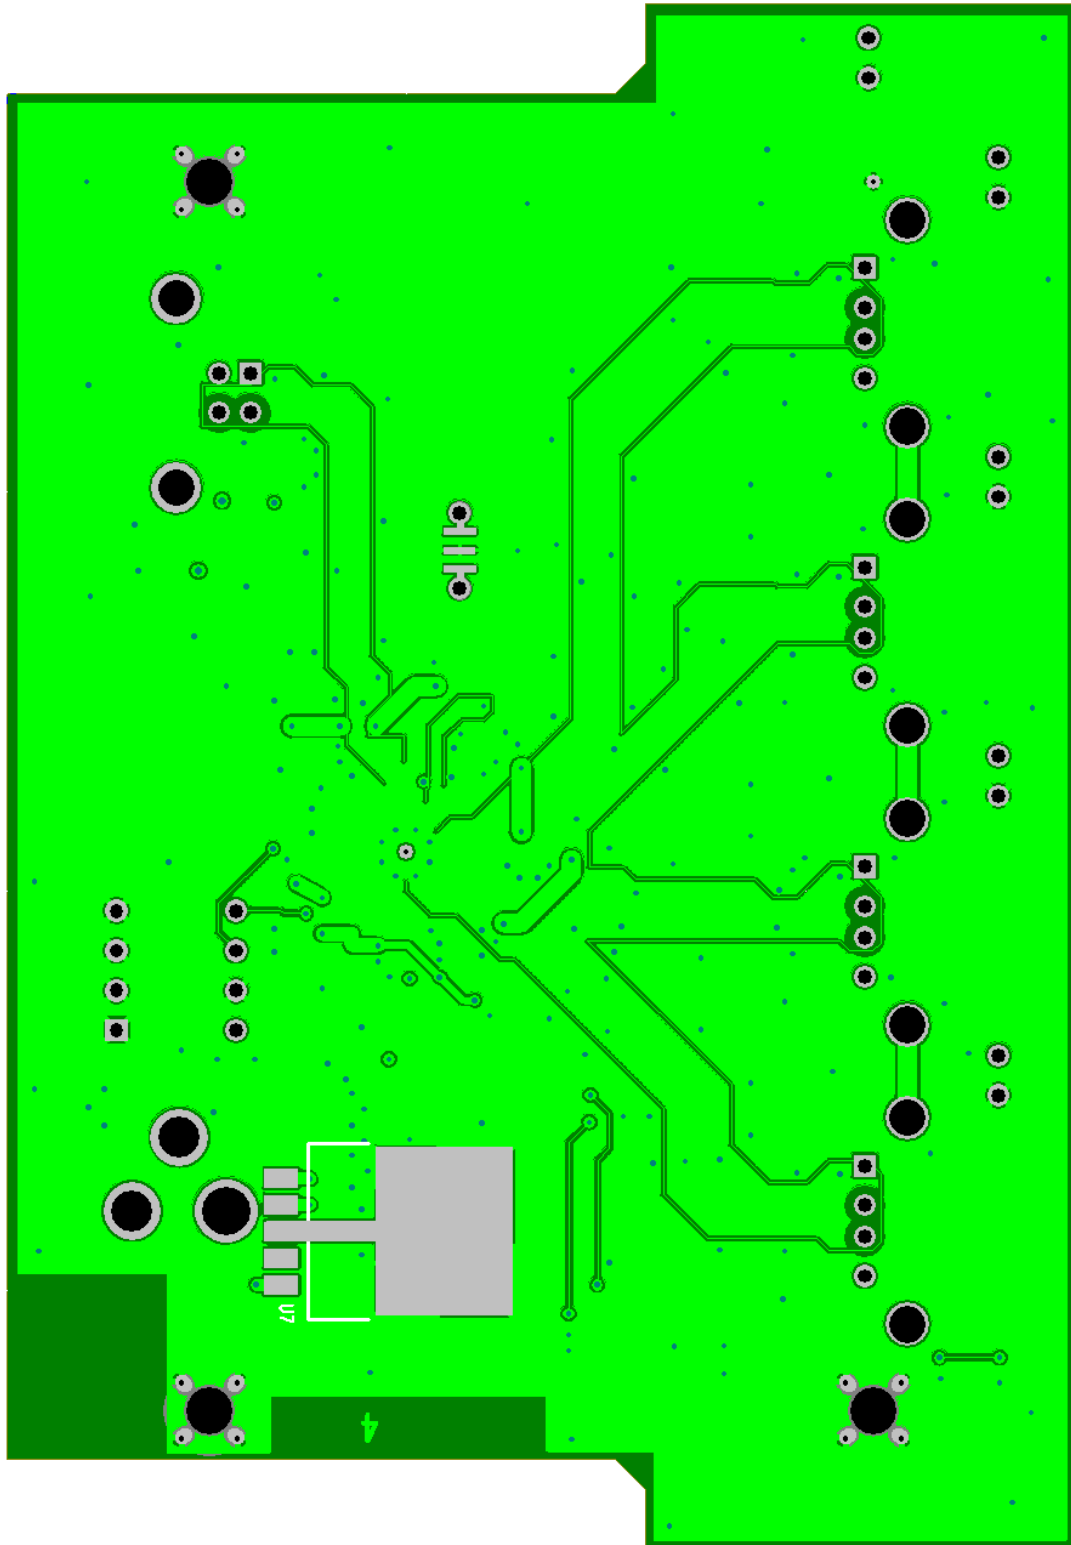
EVB-USB82514Q36-BAS Bottom Layer - Solder Side
